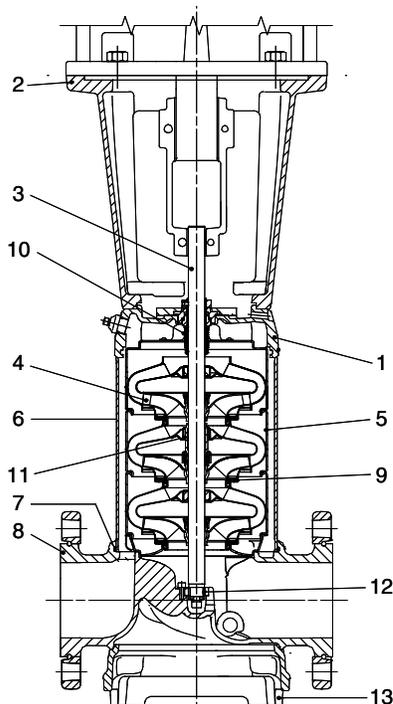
Sectional drawing of a CR(N) 120, 150 pump
